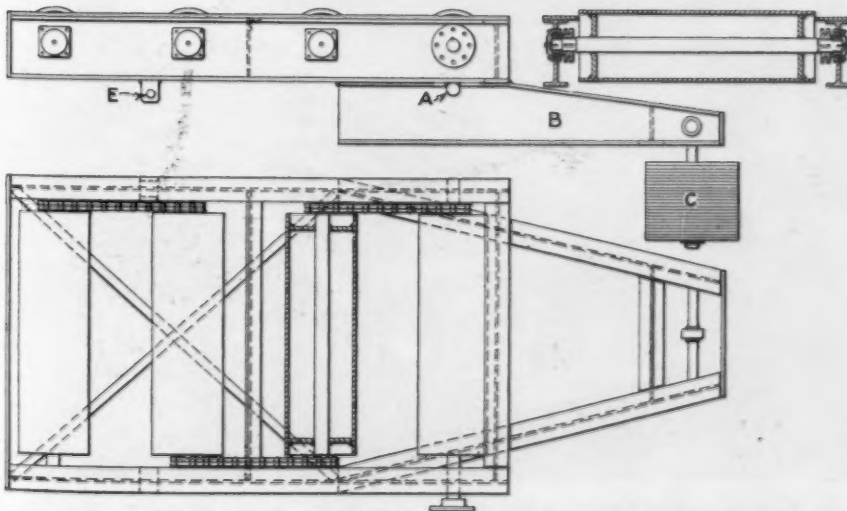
Details of small welded steel bar mill tilting table built recently in Germany.
